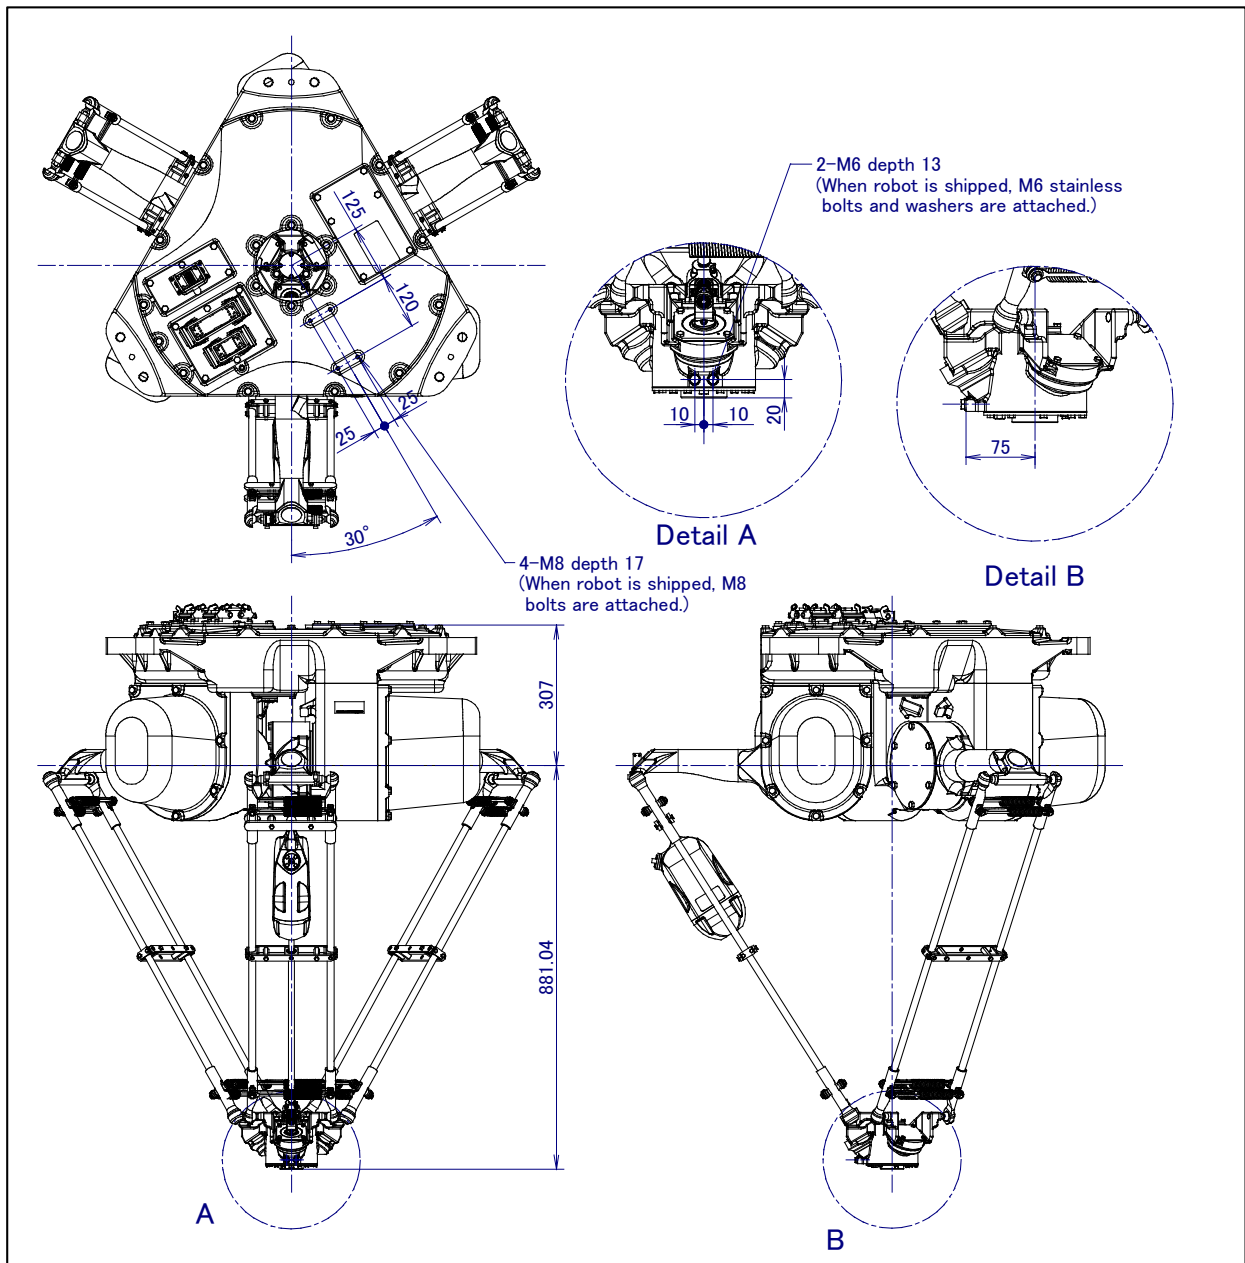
(a) Equipment mounting faces (M-3iA/6S (A05B-1523-B201))
